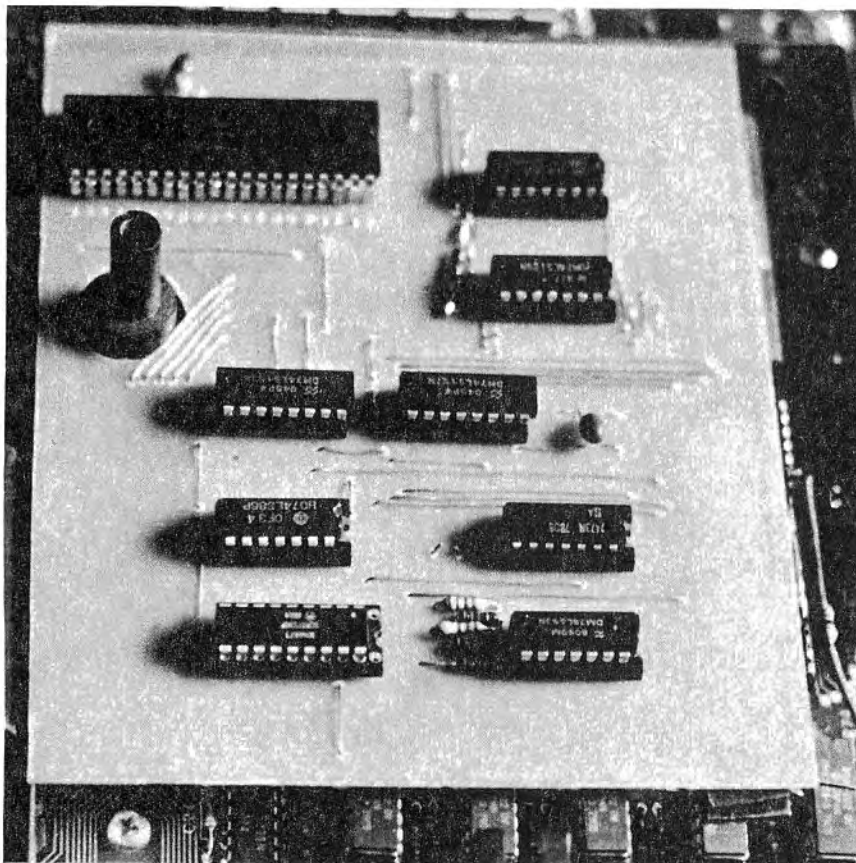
Complete lowercase board fits into VDG socket and around support port, and rest on banks of RAMs. When ICs are soldered to the board directly (they are socketed in this prototype), the RFI shield cover can be fit back in place.
